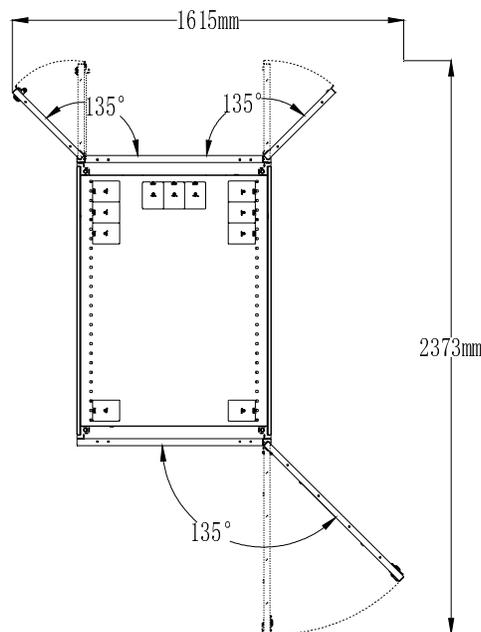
Space required to open the front and rear door of the rack (overlooking, unit: mm)
